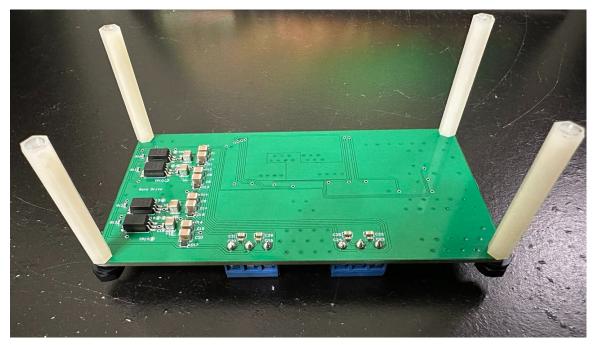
4S NCH+PCH Balancer PCB Bottom View
